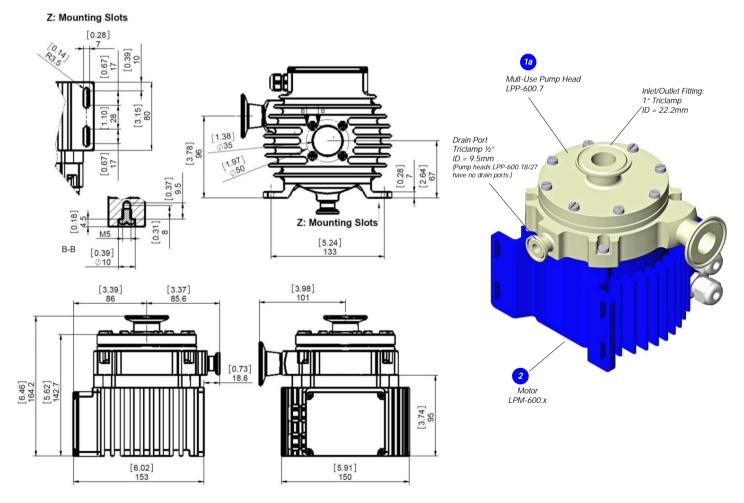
Typical dimensions of motors LPM-600.x with multi-use pump head LPP-600.7/18
